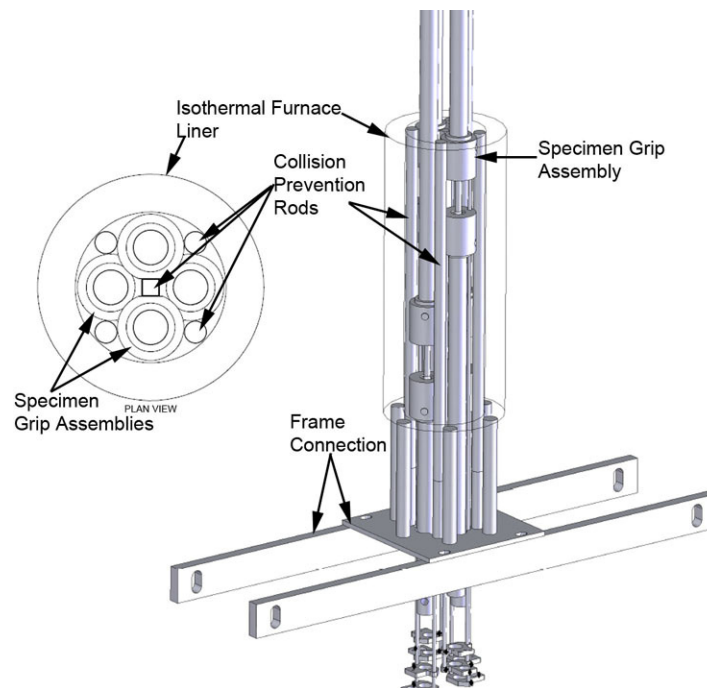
CAD drawing showing the sample grip assemblies and collision prevention system within the isothermal furnace liner.
